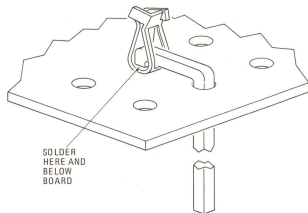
HOW MOLEX SOLDERCON AND VECTOR J-PIN can be united to form one terminal of a socket for an IC.
